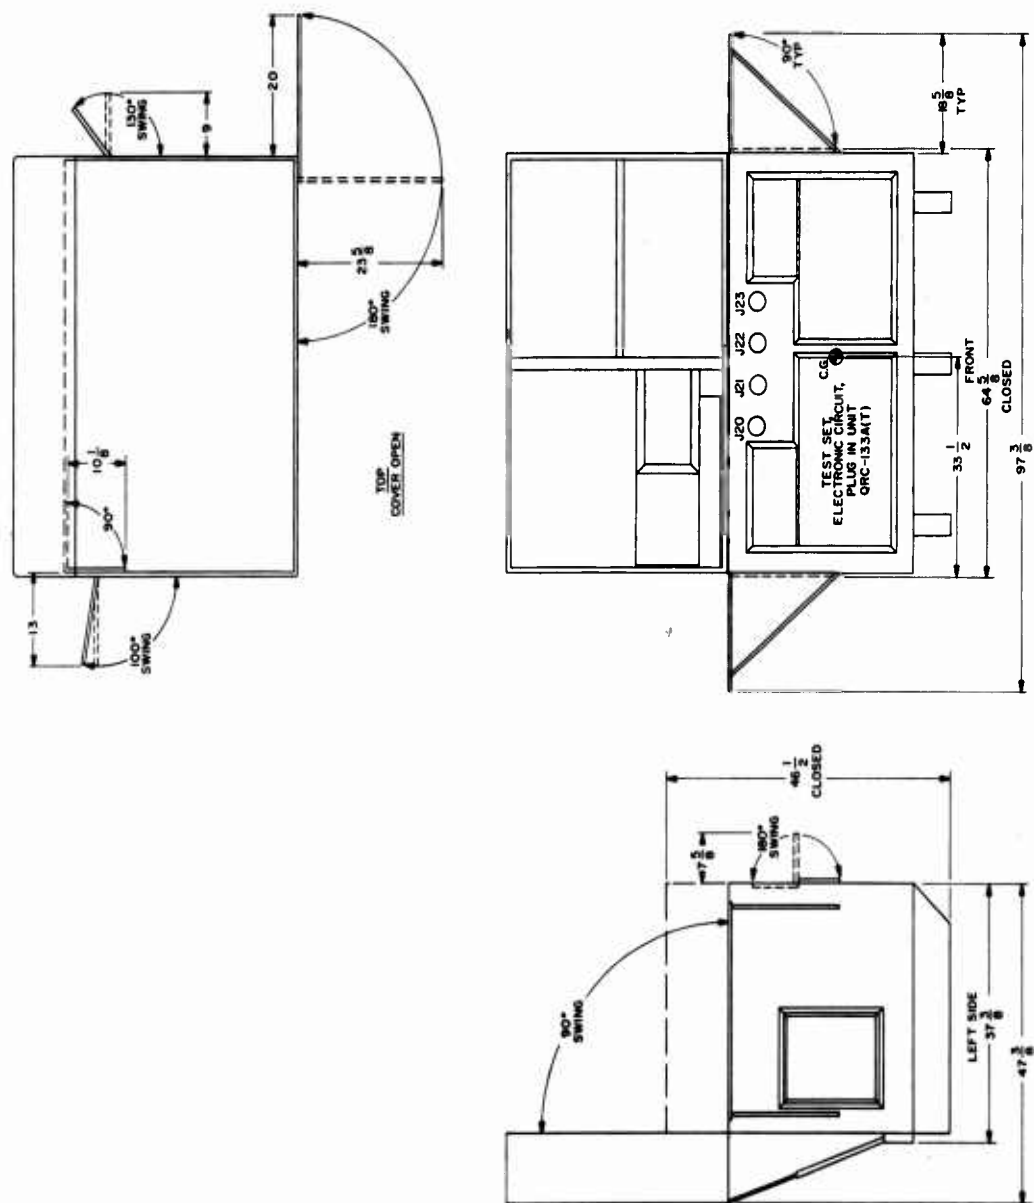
Outline Dimensional Drawing, Test Set, Electronic Circuit, Plug-in Unit QRC-133A(T).
